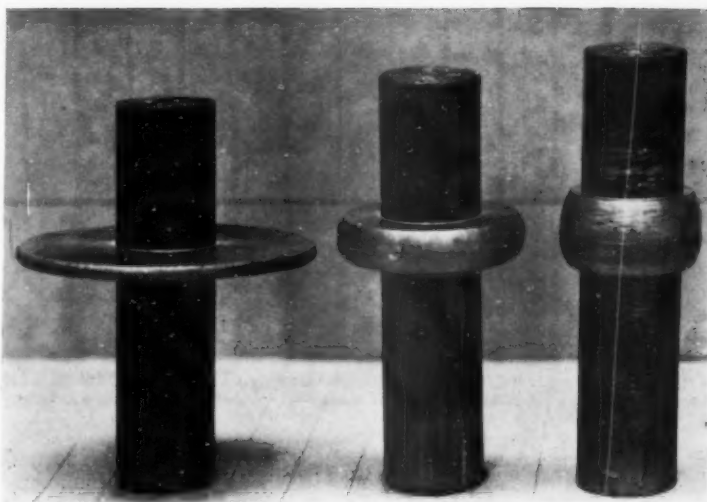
Cold welded specimens of aluminium (approximately ½ normal size).
